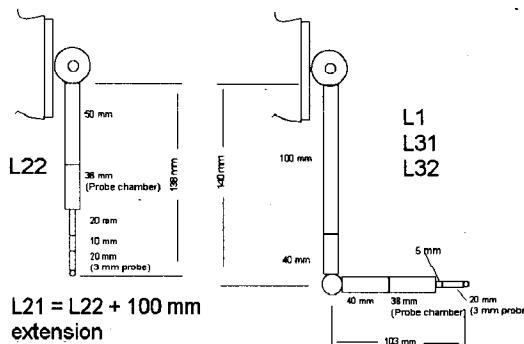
Probe assemblies for Mitutoyo plate measurements
